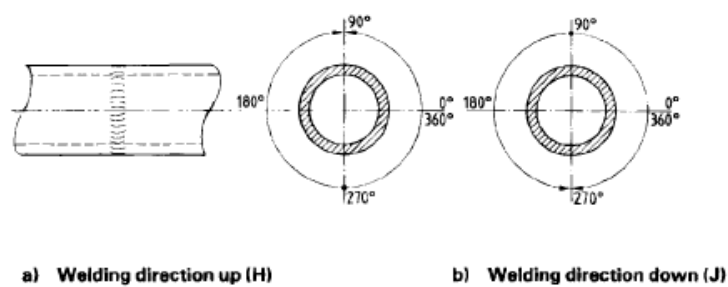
Examples of welding direction on fixed pipe with horizontal axis
